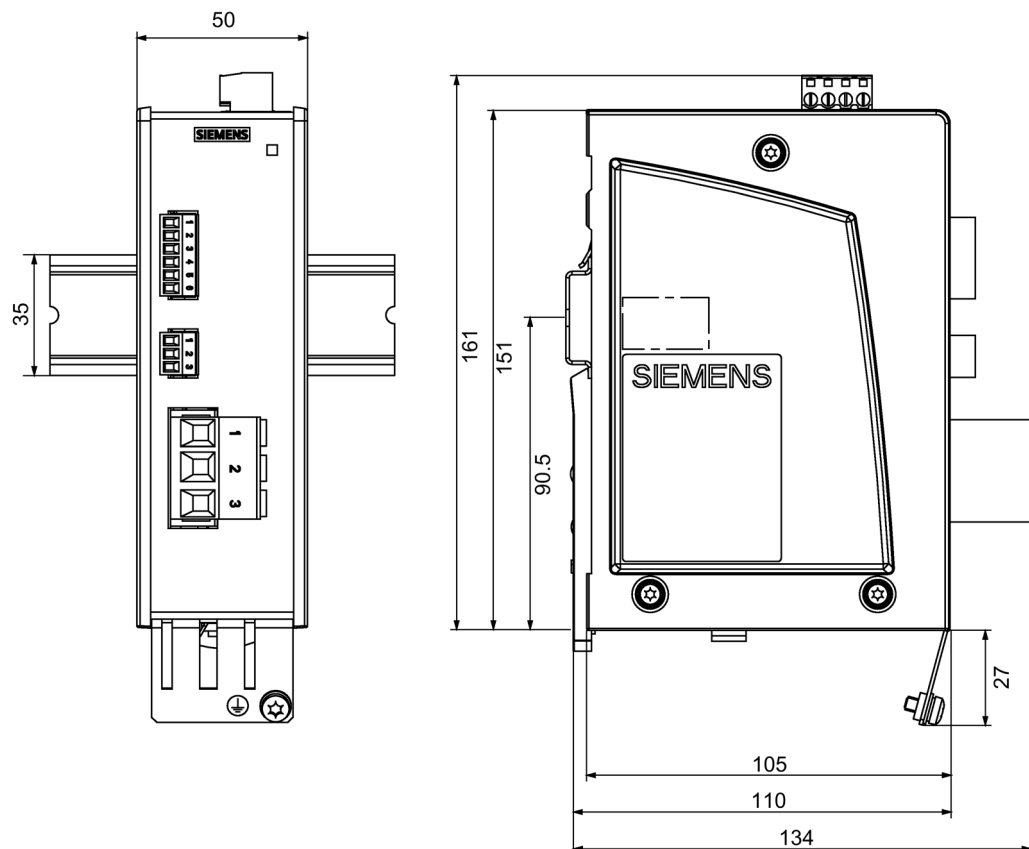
Dimension drawing of Voltage Sensing Module VSM10
